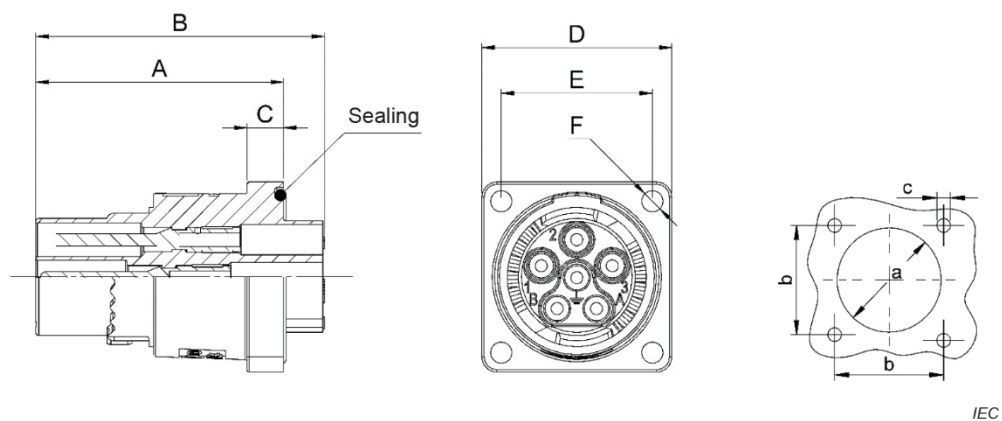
Fixed connector, male contacts, with a square flange front mounting
